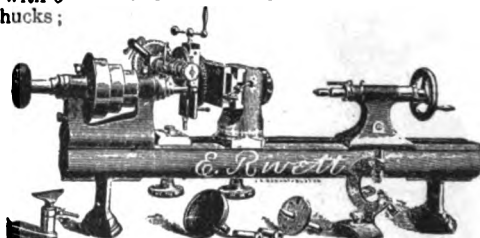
RIVETT BENCH LATHE, NO. 3,
